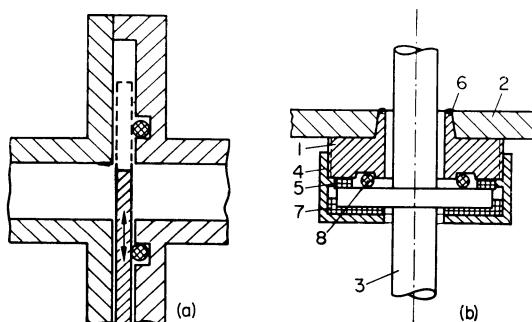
O-ring and groove seals for special purposes: (a) sliding plate (after Wahl¹²⁸¹); (b) insulated lead-in (after Edwards³²⁵)
